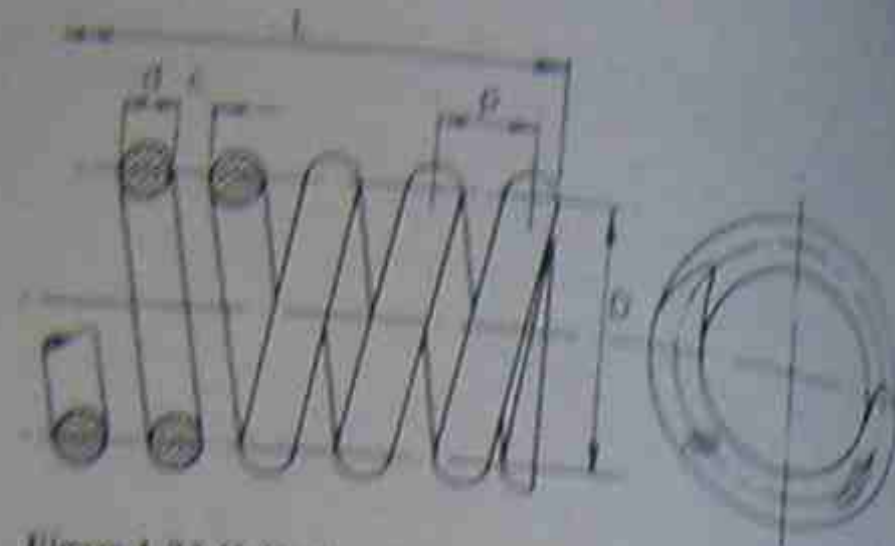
Helical spring dimensions: D = mean diameter of coils; d = wire diameter; c = coil clearance; L = spring length; p = pitch
